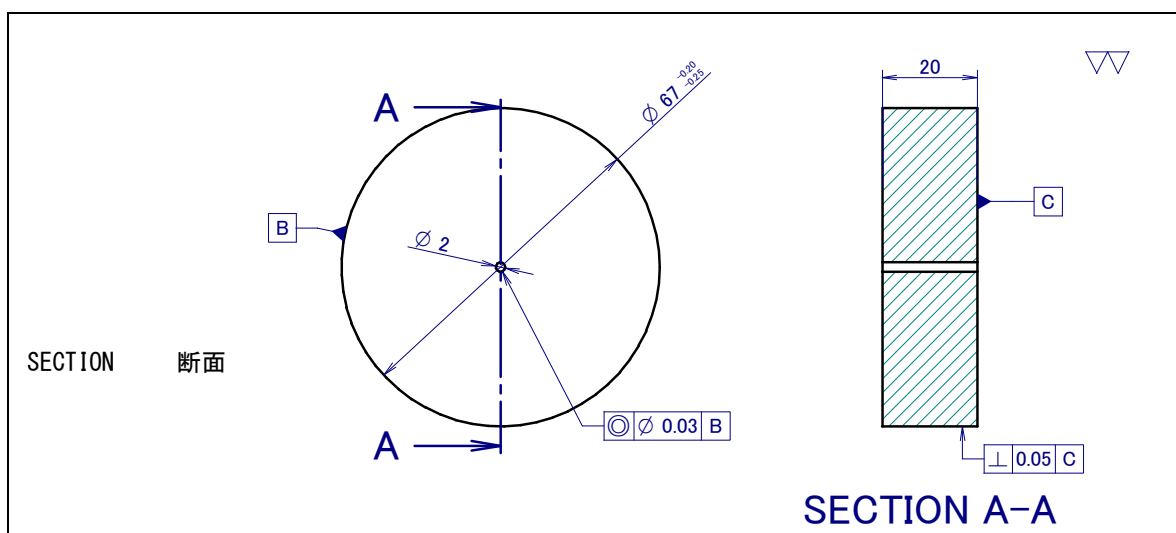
(r) Adapter for follower unit (non-insulated flange) (Spec: A290-7220-X976)
